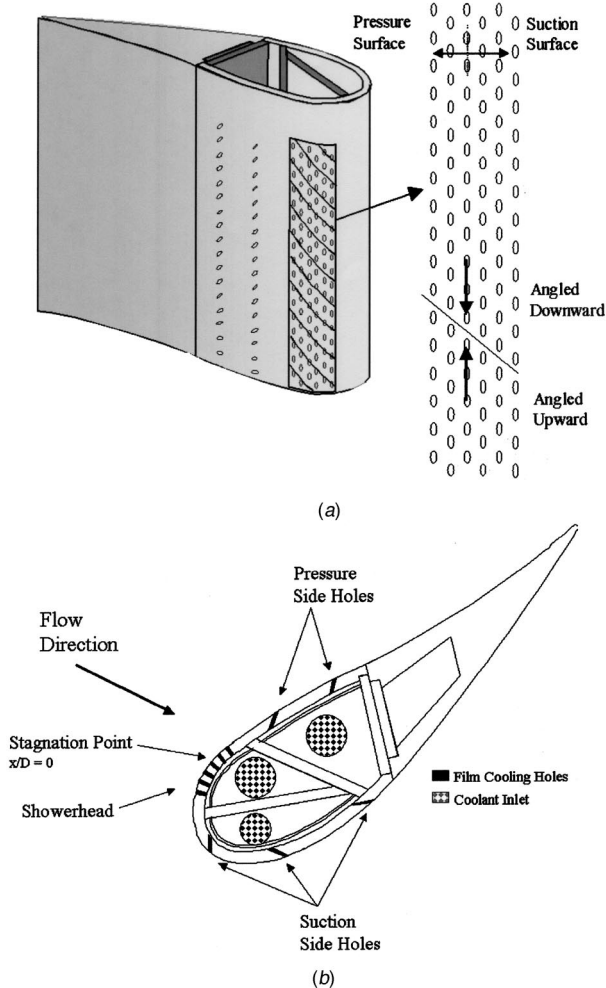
(a) Showerhead and pressure side cooling holes (b) Schematic of film cooling hole configuration
